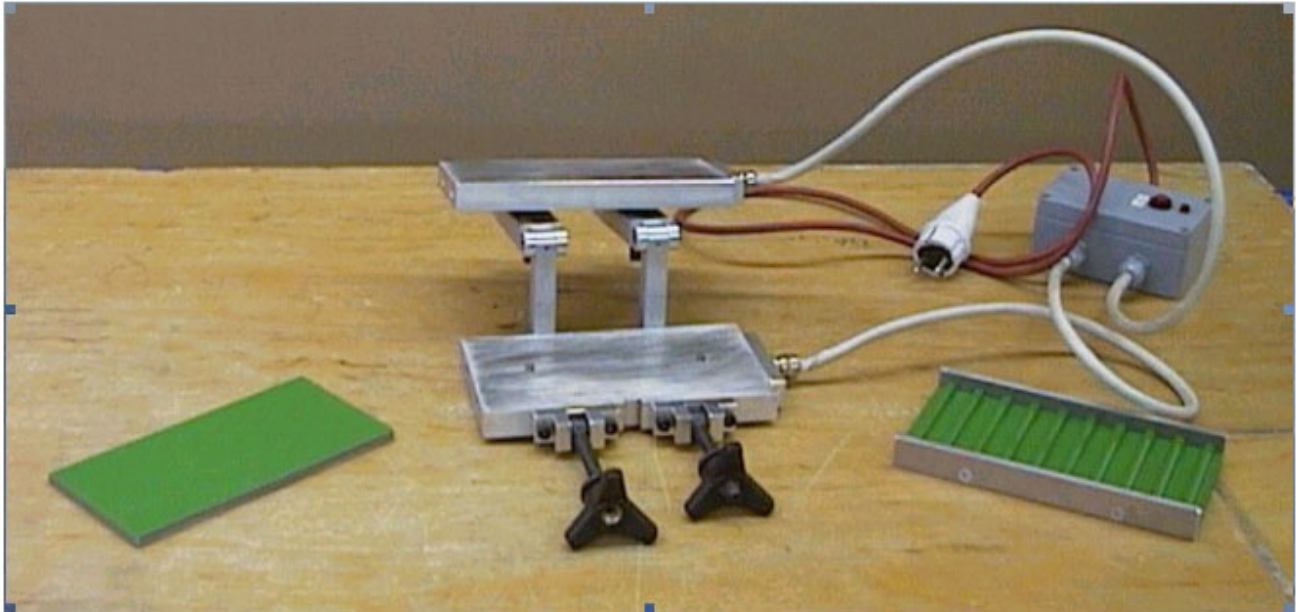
Components of welder include press, toothed and top plates, and controls. A bonding agent is required for operation and is not sold by BRECOflex CO., L.L.C. – visit www.brecoflex.com/fieldwelder for the bonding agent specifications and a list of vendors.
